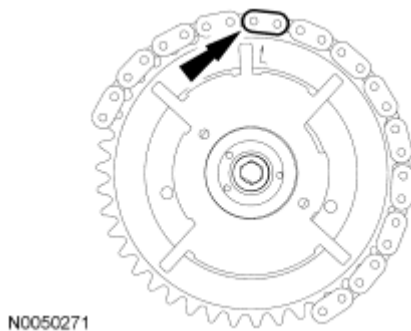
Locating Camshaft Sprocket Timing Copper Mark
